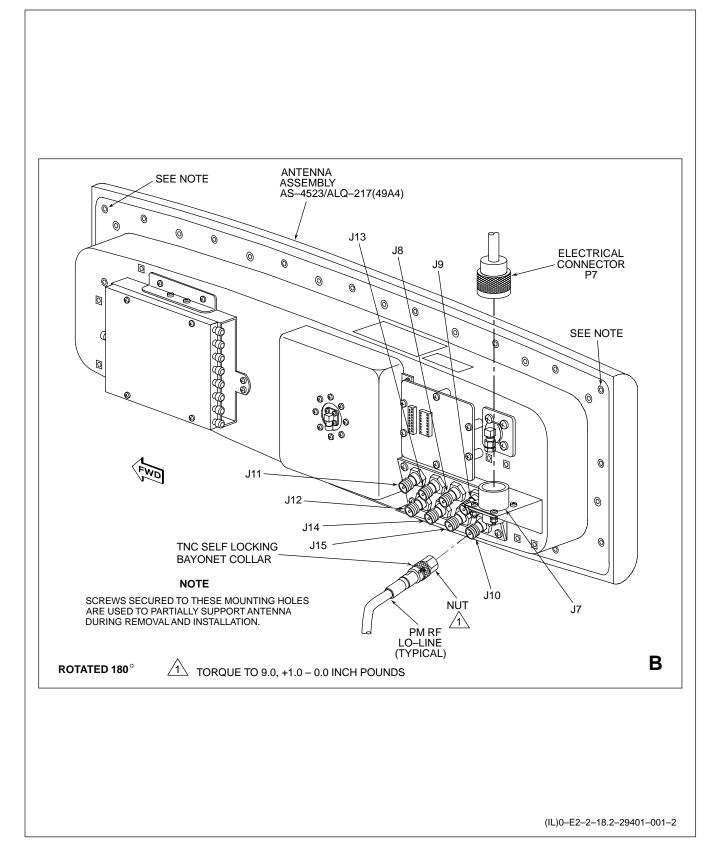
Removal and Installation of Antenna Assembly AS-4524/ALQ-217 (Sheet 2)
